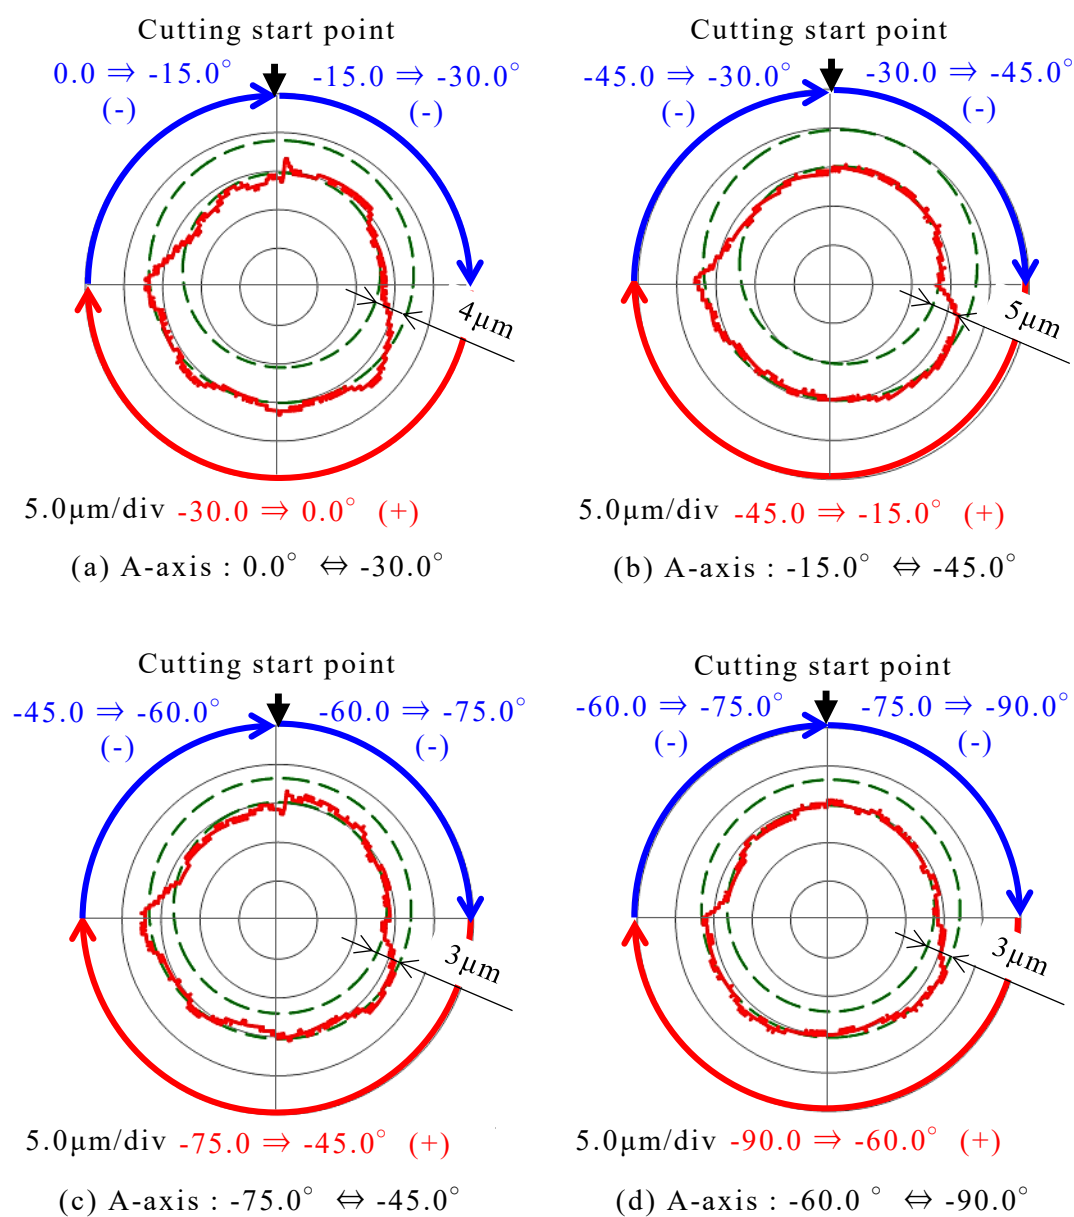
Comparison of machined results by circular machining test without compensation
